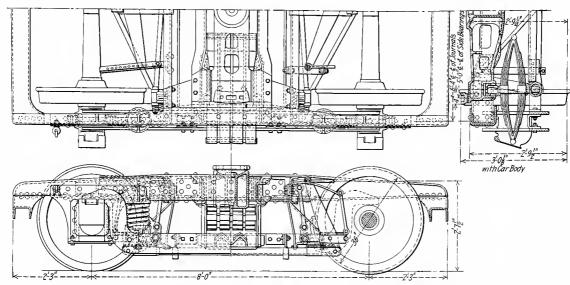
Four-Wheel Truck for Electric Motor Car. Standard Motor Truck Company.
